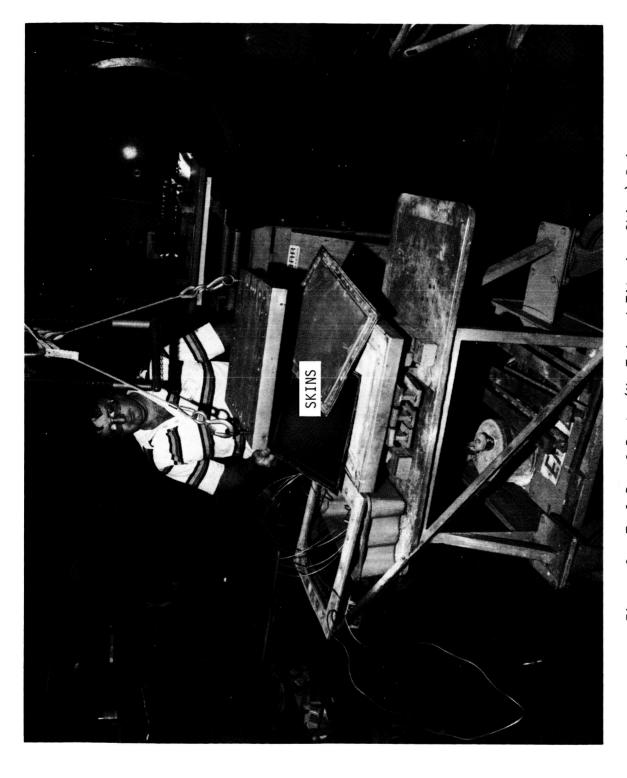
Tool Proof Parts (Un-Trimmed Titanium Skins) Being Removed from SPF Tool
